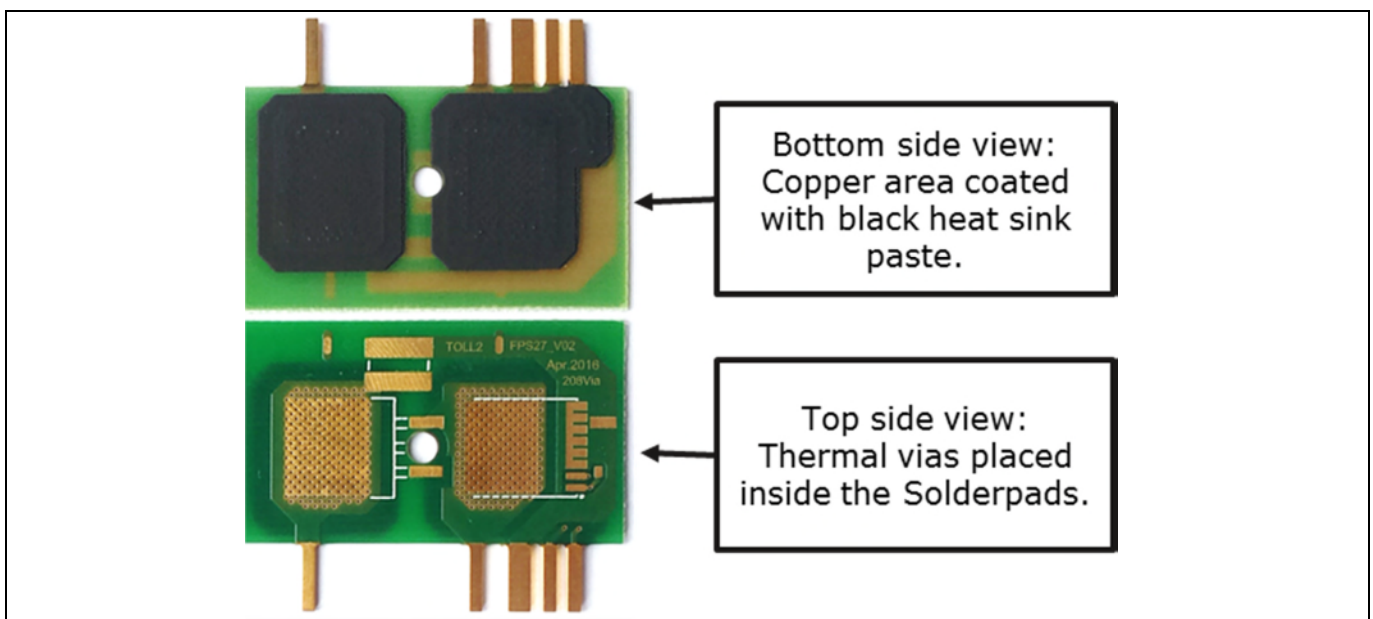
Daughter PCB with heat sink paste (pcb made in Italy by Serigroup Srl www.serigroup.it)
